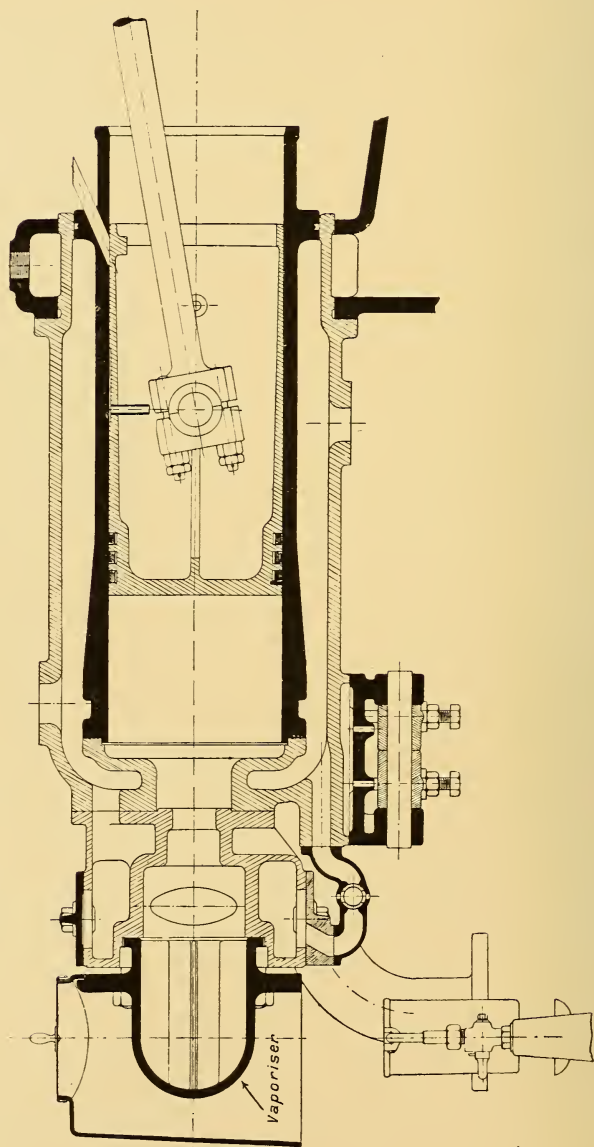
Section of cylinder and vaporizer—Hornsby Oil Engine.
